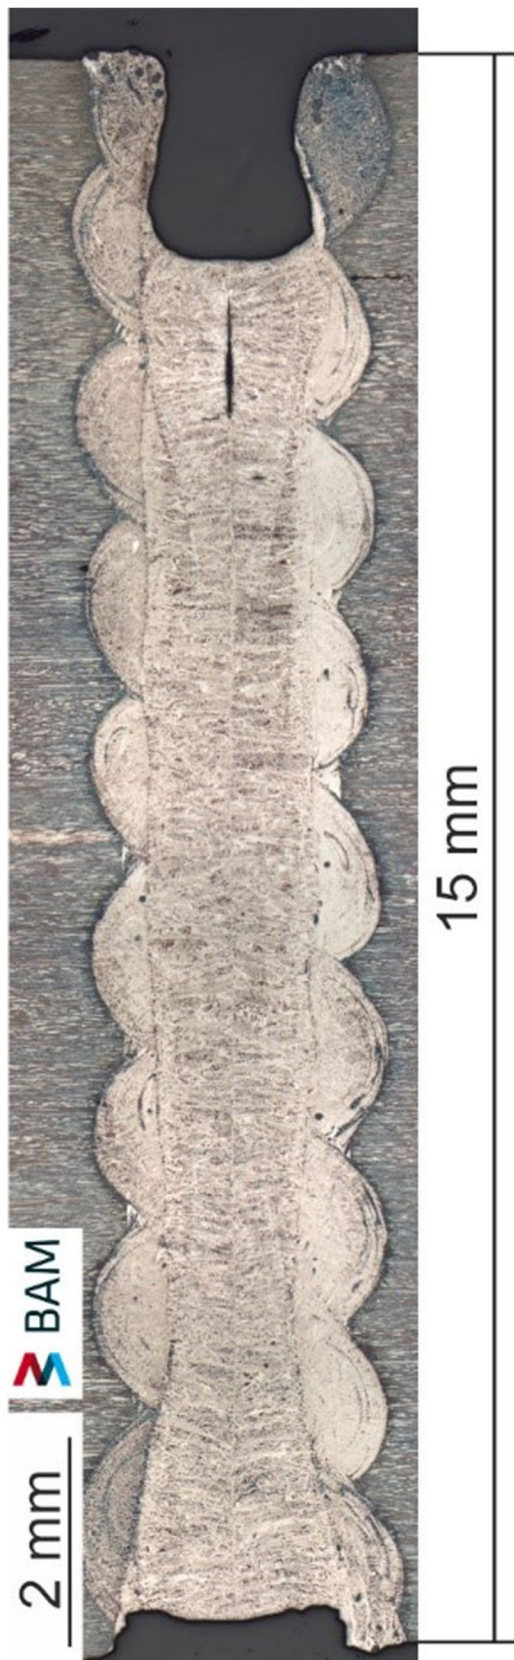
Cross-sections of weld seam with underfilling and solidification crack
